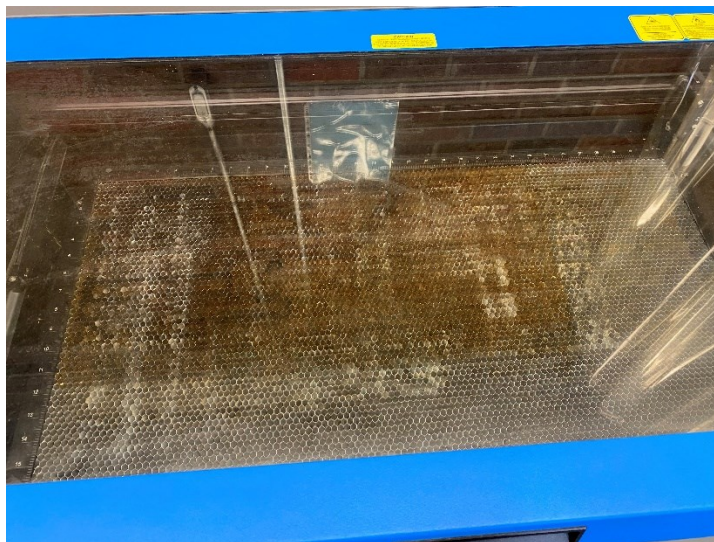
Laser scribing equipment used to develop LIG sensors
